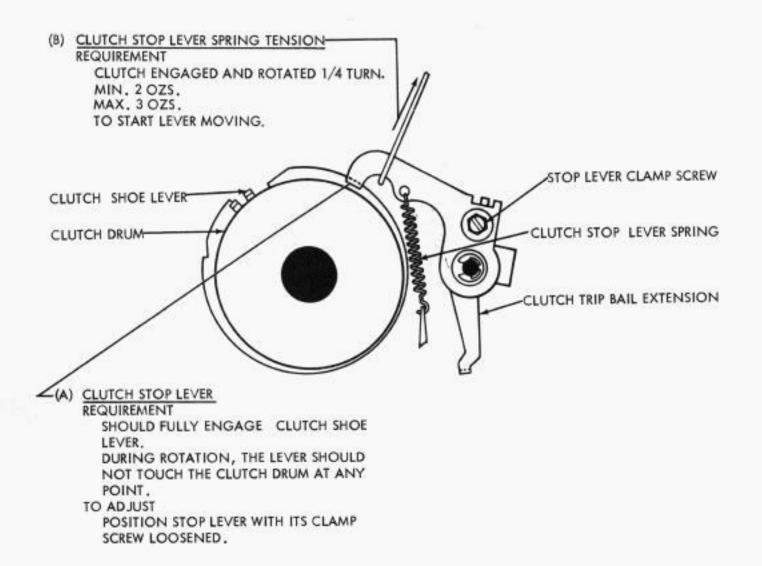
SIGNAL GENERATOR CLUTCH AND GEAR MECHANISM
